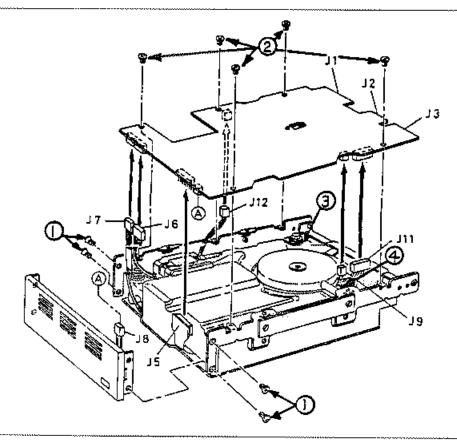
HARD DISK DRIVE DISASSEMBLY/ASSEMBLY
